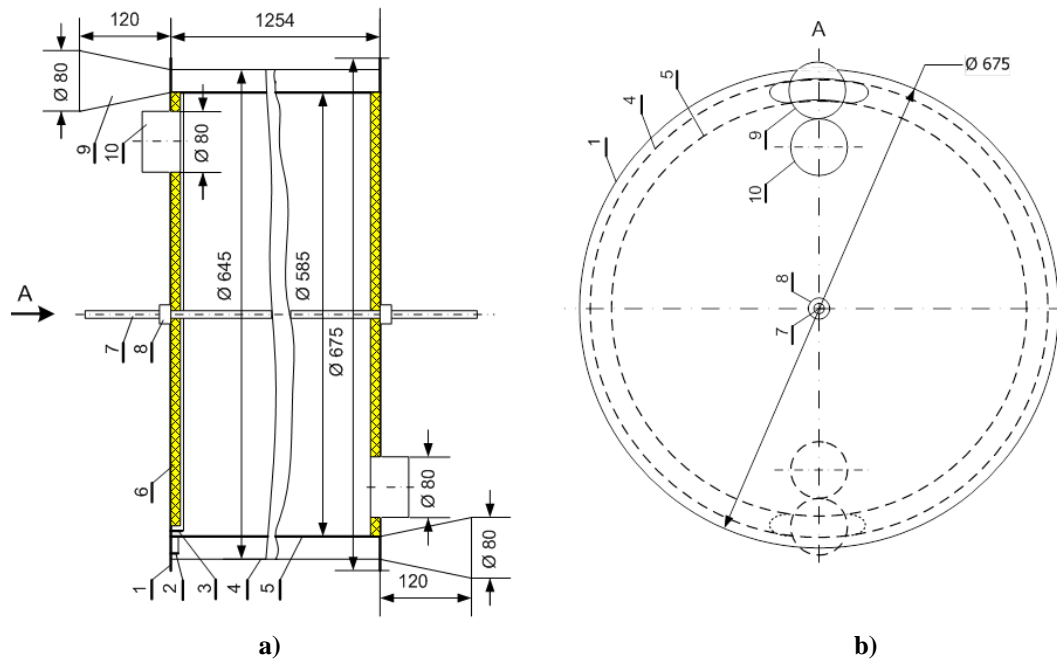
Construction of the cylindrical solar collector, a) side view and b) top view: 1 – end disc; 2 – outer ring; 3 – inner ring; 4 – outer cylinder; 5 – inner cylinder; 6 – heat insulation; 7 – discs joining screw; 8 – screw nut; 9;10 – air inlet-outlet openings.
